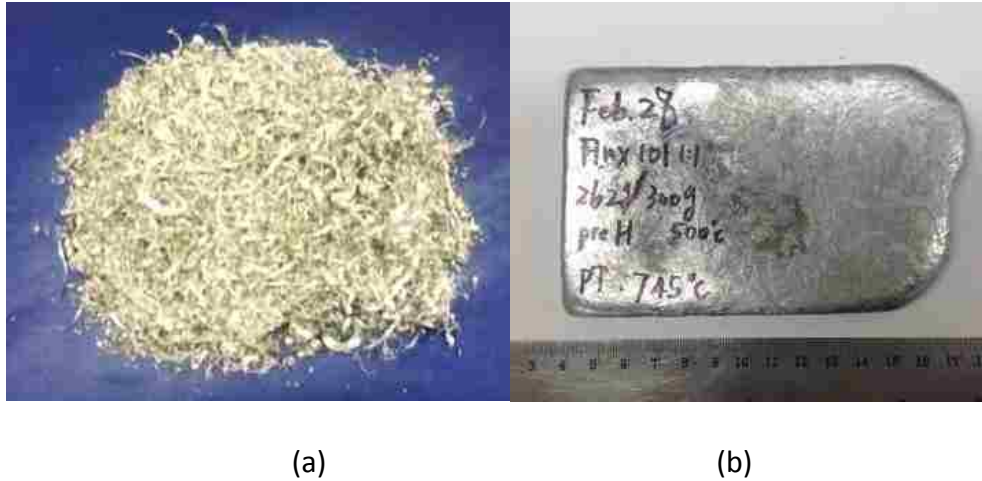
(a) machining chips of aluminum alloy 380, and (b) a cast plate of the recycled alloy.
